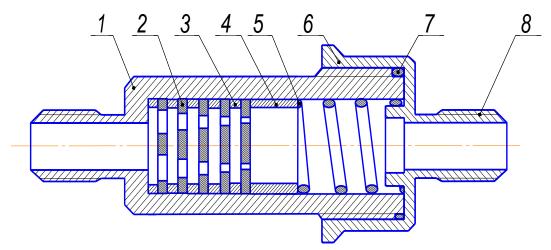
Device for regulating the speed of lifting - lowering the cargo dump platform: 1 - case; 2 - throttle washers; 3 - rings; 4 - bushing 4; 5 - spring; 6 - cover; 7 - seals; 8 - union
